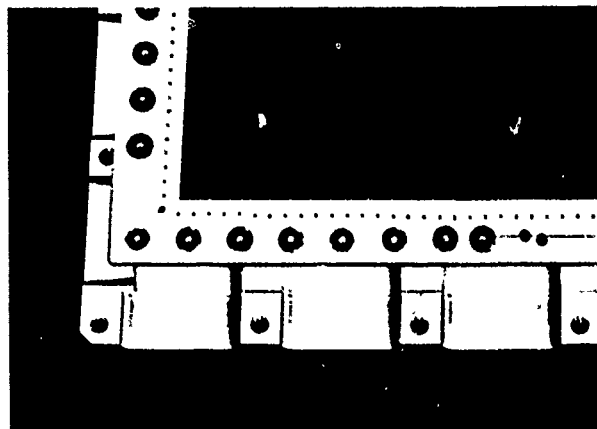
An Example of PCM Fabrication and Laser Welding of Thin Foils
